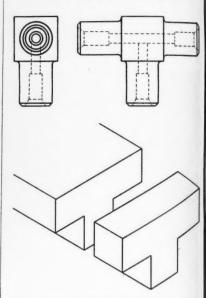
Above is Shown the Design of a Tee made from the Extruded Stock Shown in the Lower Part of the Illustration
